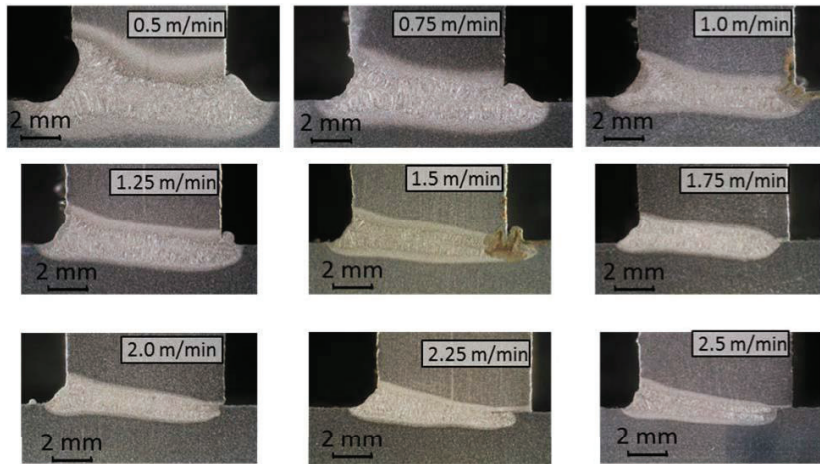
Cross sections of the joints welded with 6 kW laser power, defocus -2 mm and welding speeds ranging from 0.5 m/min to 2.5 m/min.
